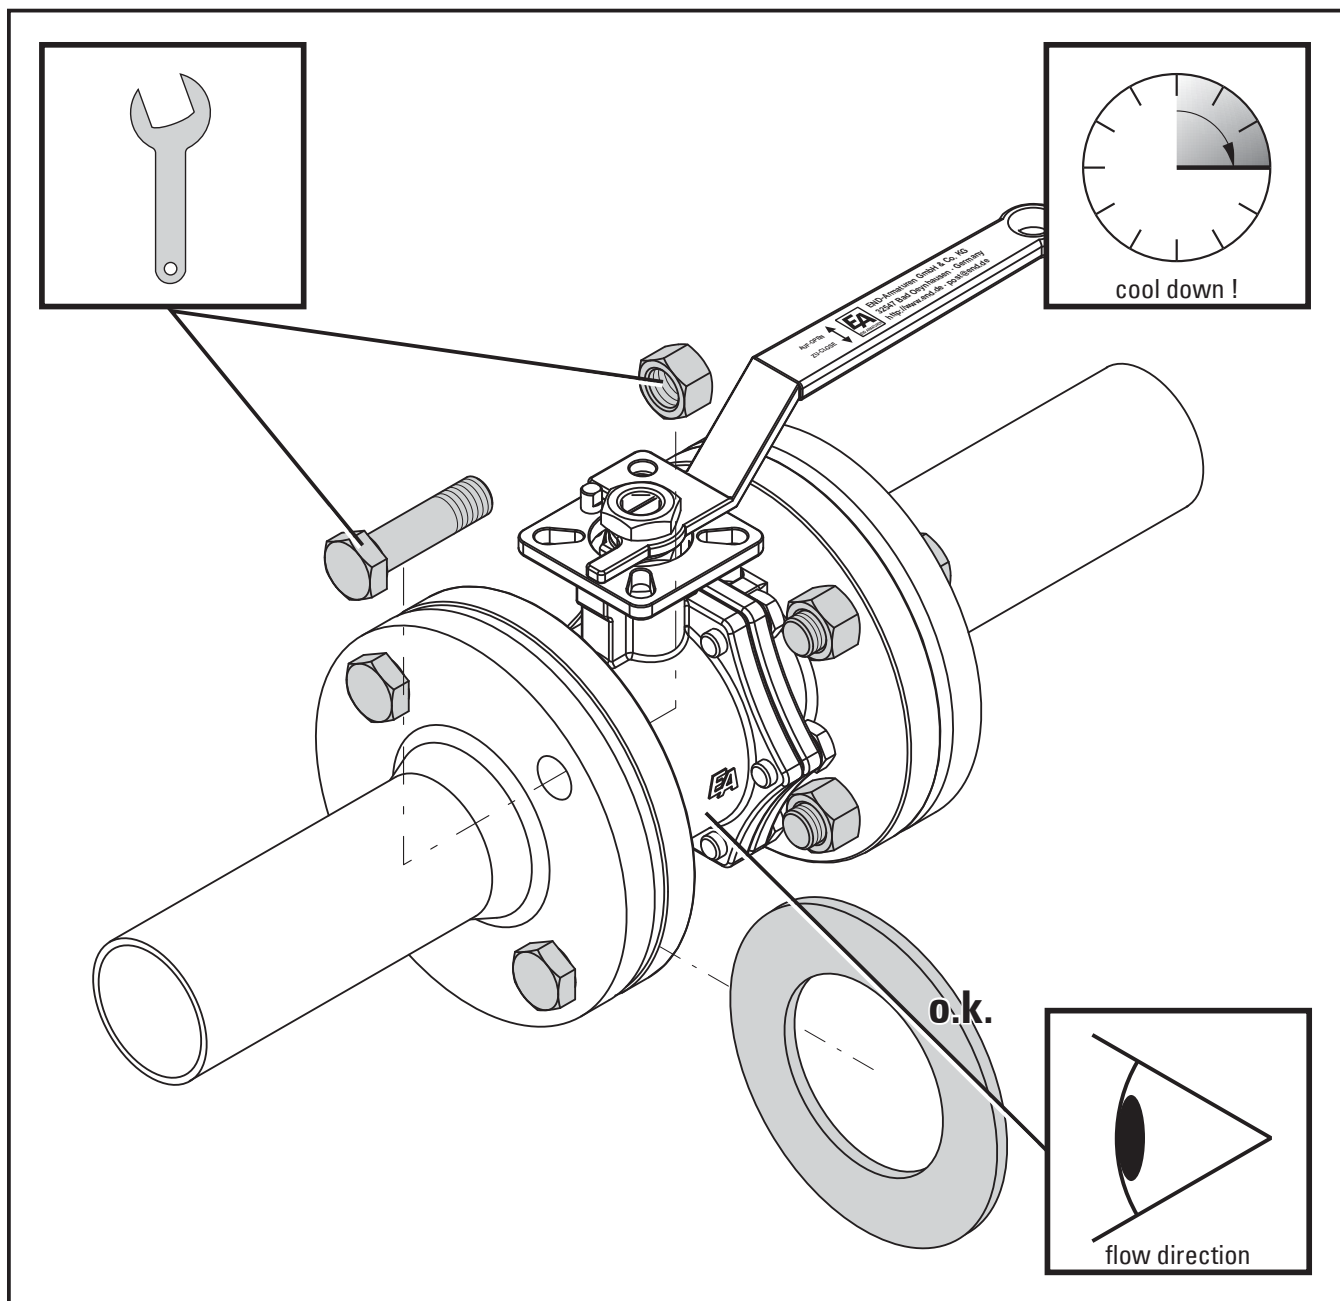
ball valves, mounting flanged connection (Fig.: Art. ZP311007)
